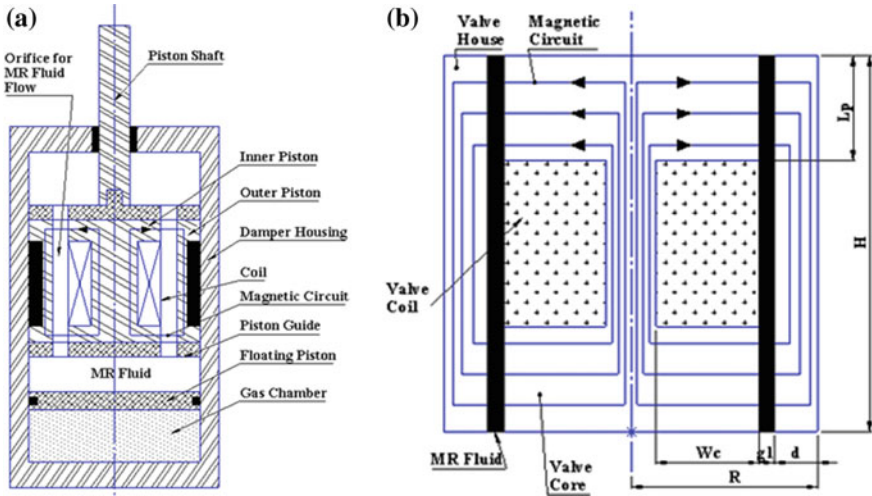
Schematic configuration of a single-coil. a MR damper, b MR valve
